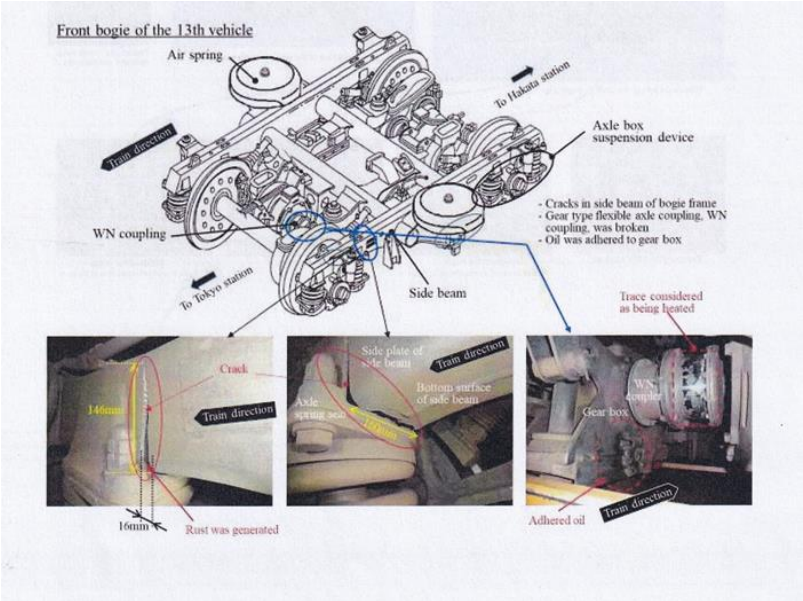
Bogie structure and the fatigue fracture of the side beam weld. Source [2]
